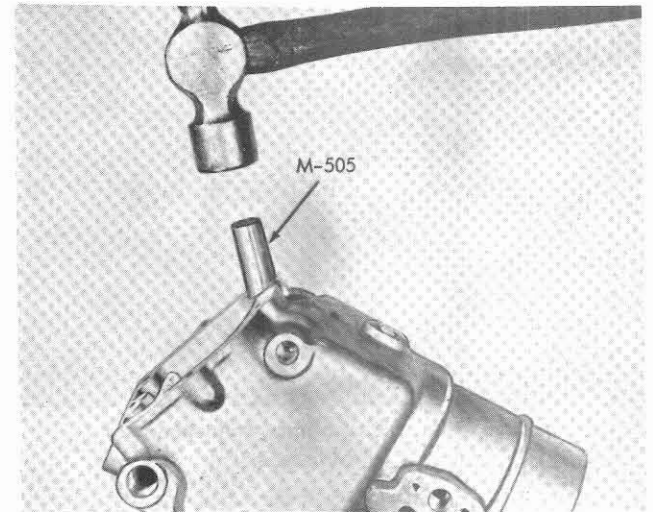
Driving Pump-Discharge Valve to Depth in Housing
